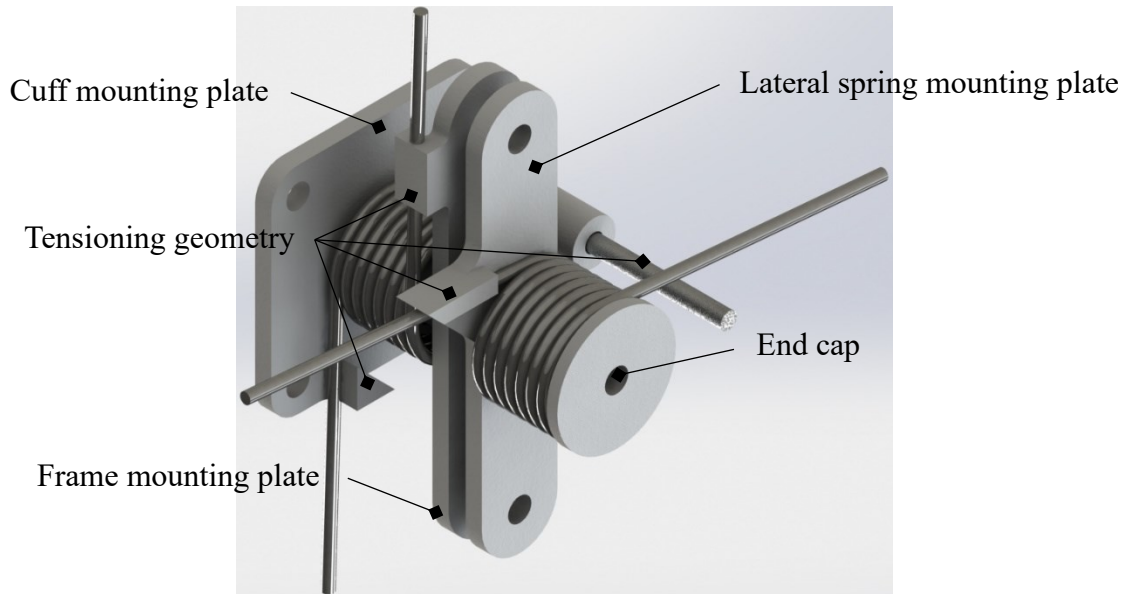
Design of the transverse rotation CM, showing the revolute joint and spring installation.
